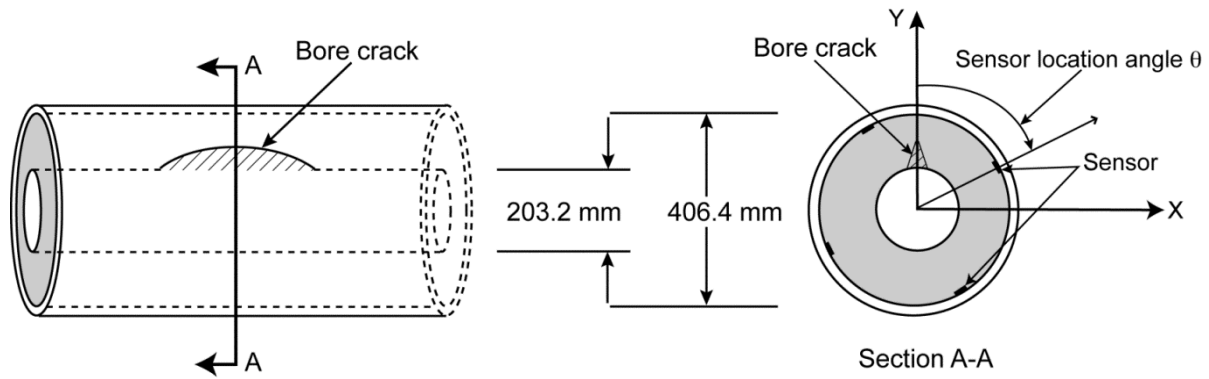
Schematic of rocket motor with bore crack centered on the motor midplane (section A-A).
